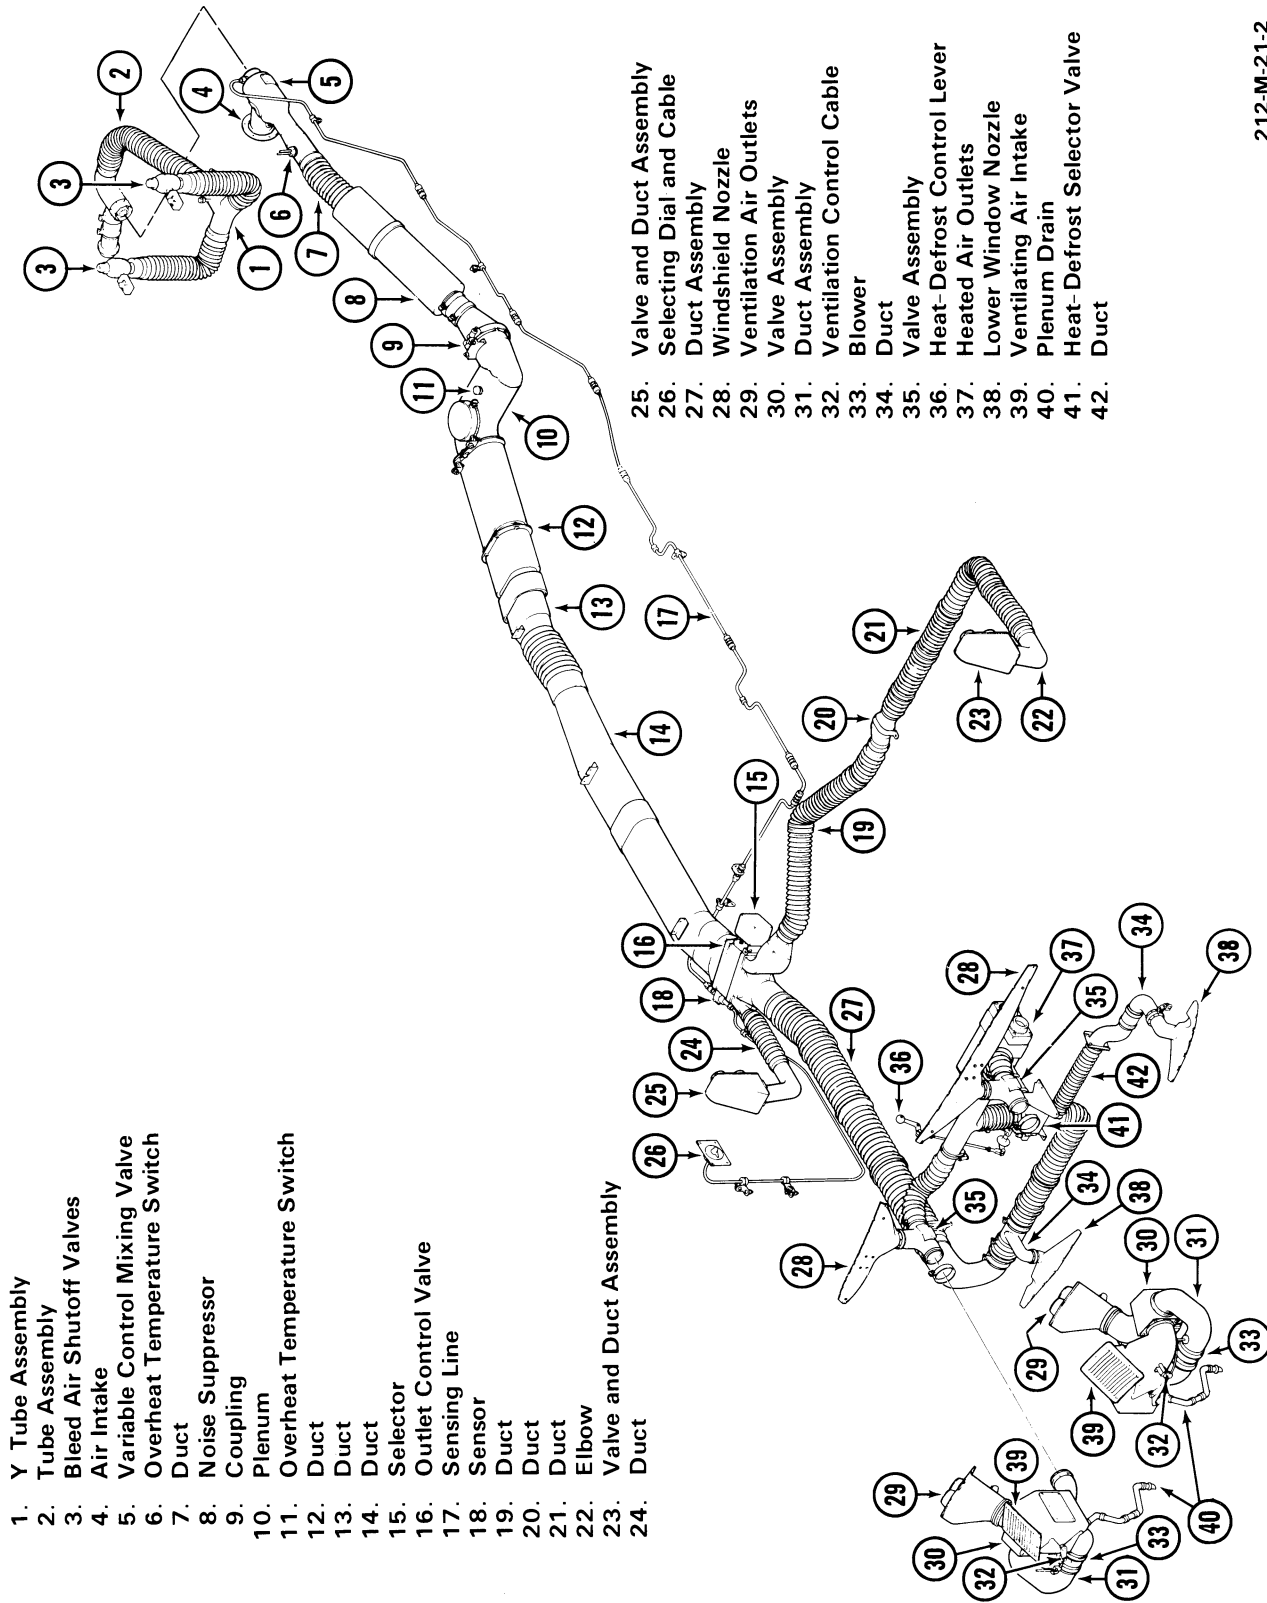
Bleed air heating system (S/N 30504 through 30553)
